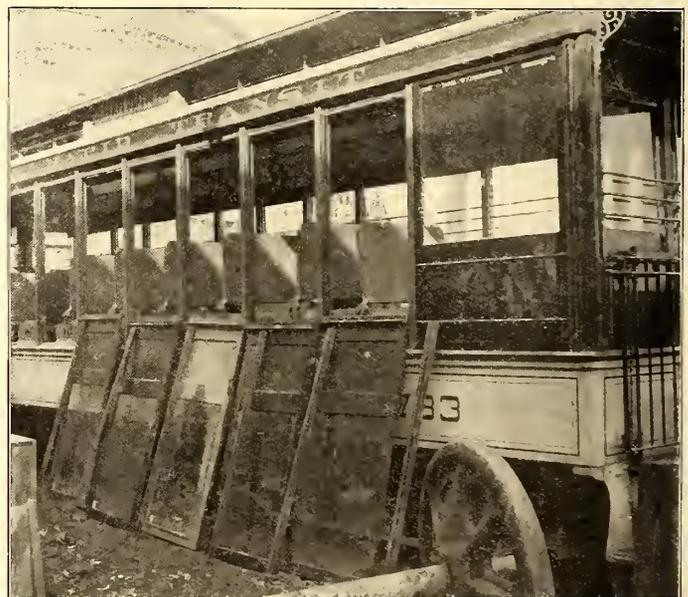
NEAR VIEW OF SIDE OF CAR, SHOWING RETAINER CASTINGS AND SASH
